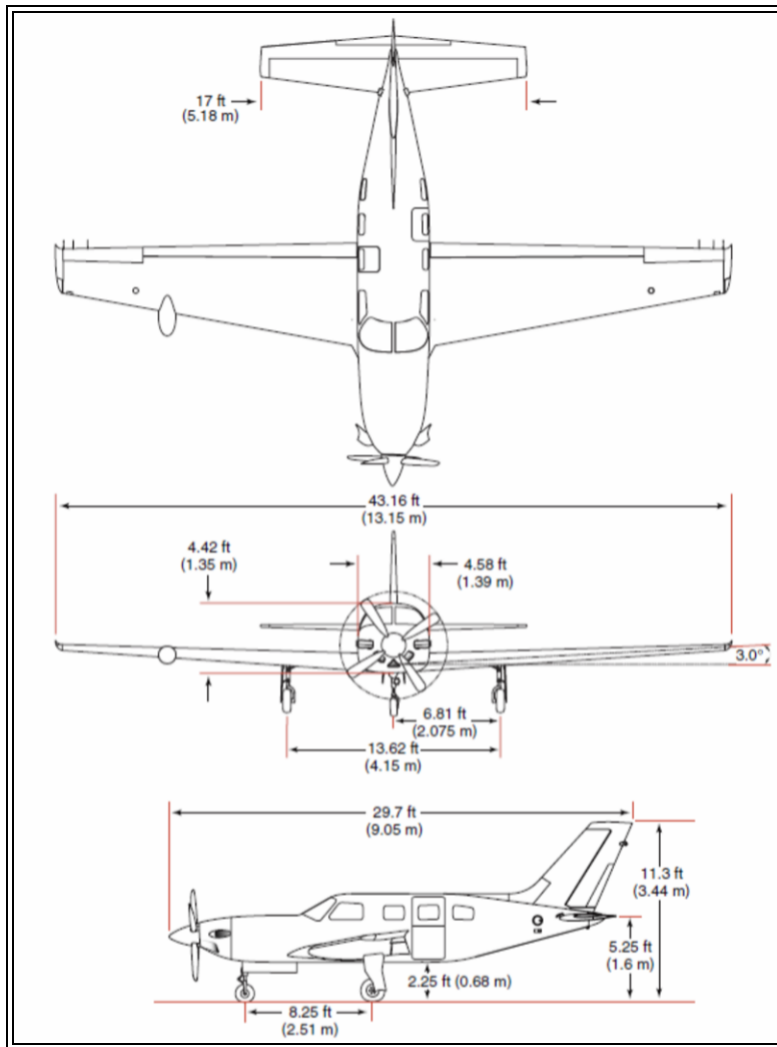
Piper PA-46-600TP M600 airplane 3-view drawing.
